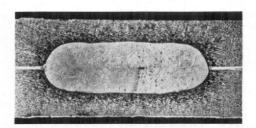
Spot weld in nickel-plated lowcarbon steel (S.84).
